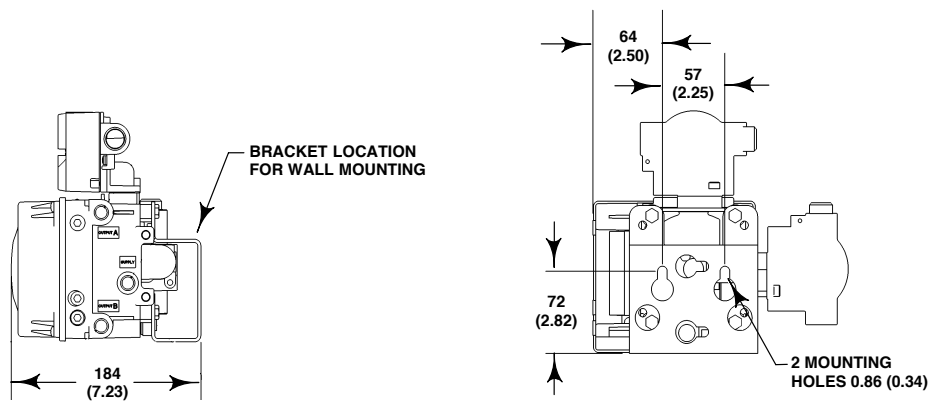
Dimensions for Type DVC6030 Digital Valve Controller with Integrally Mounted Filter Regulator
